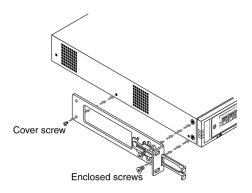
Fastening the Mounting Brackets to the Route Unit
